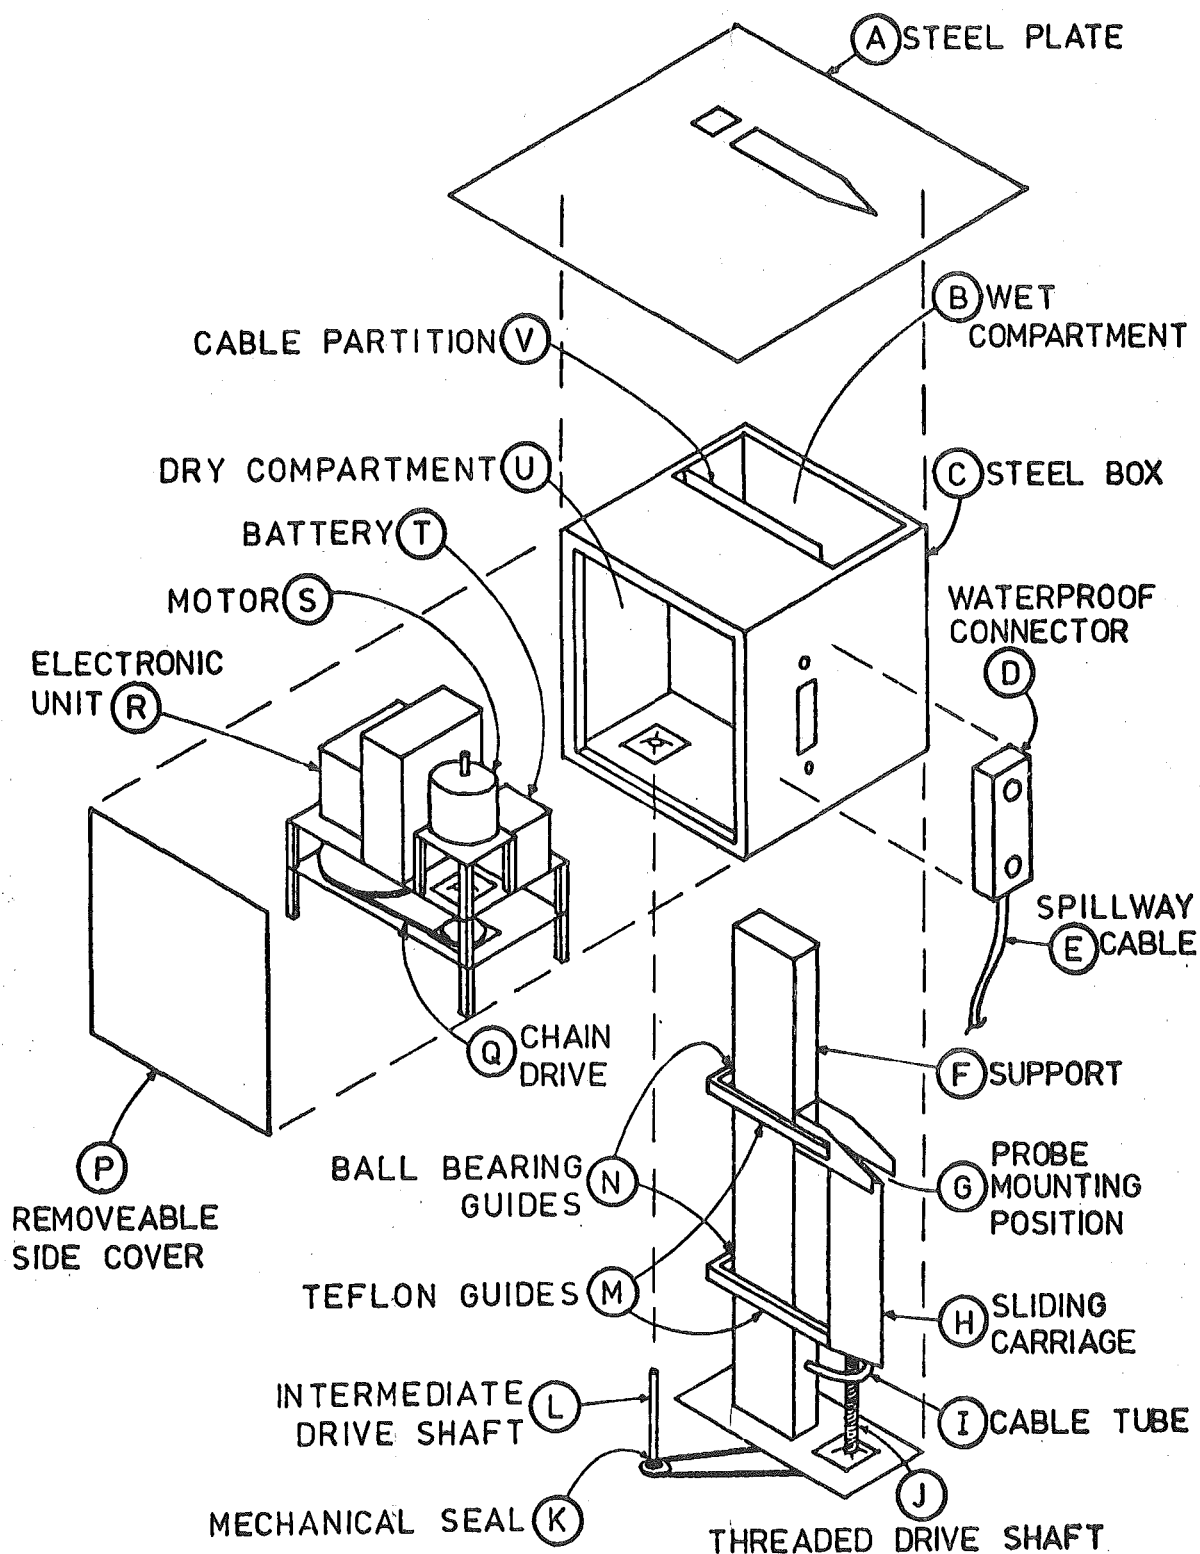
Schematic of Spillway Instrument Assembly.
